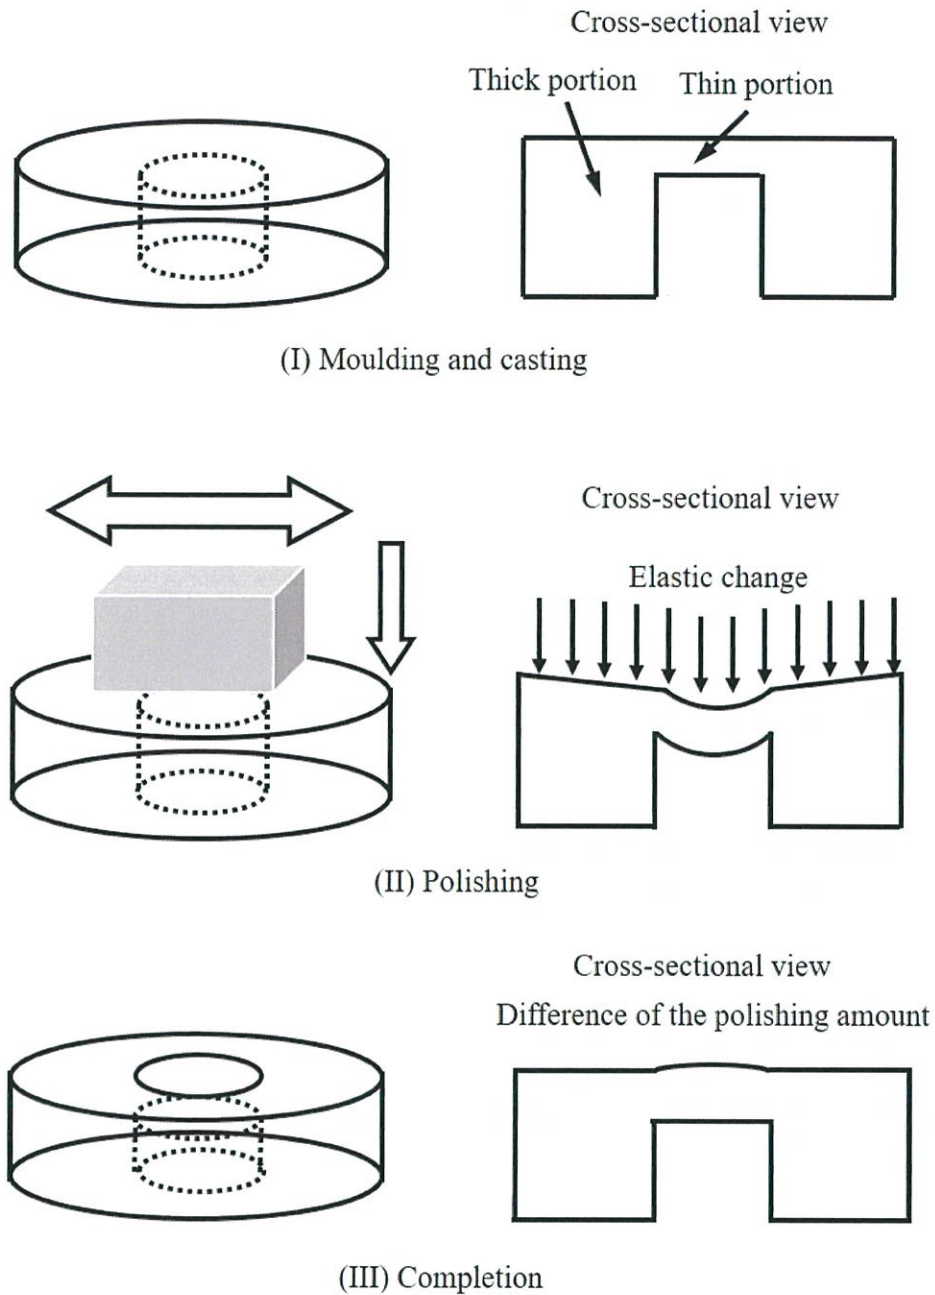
Traditional fabrication method (Skilled craftsmen)
